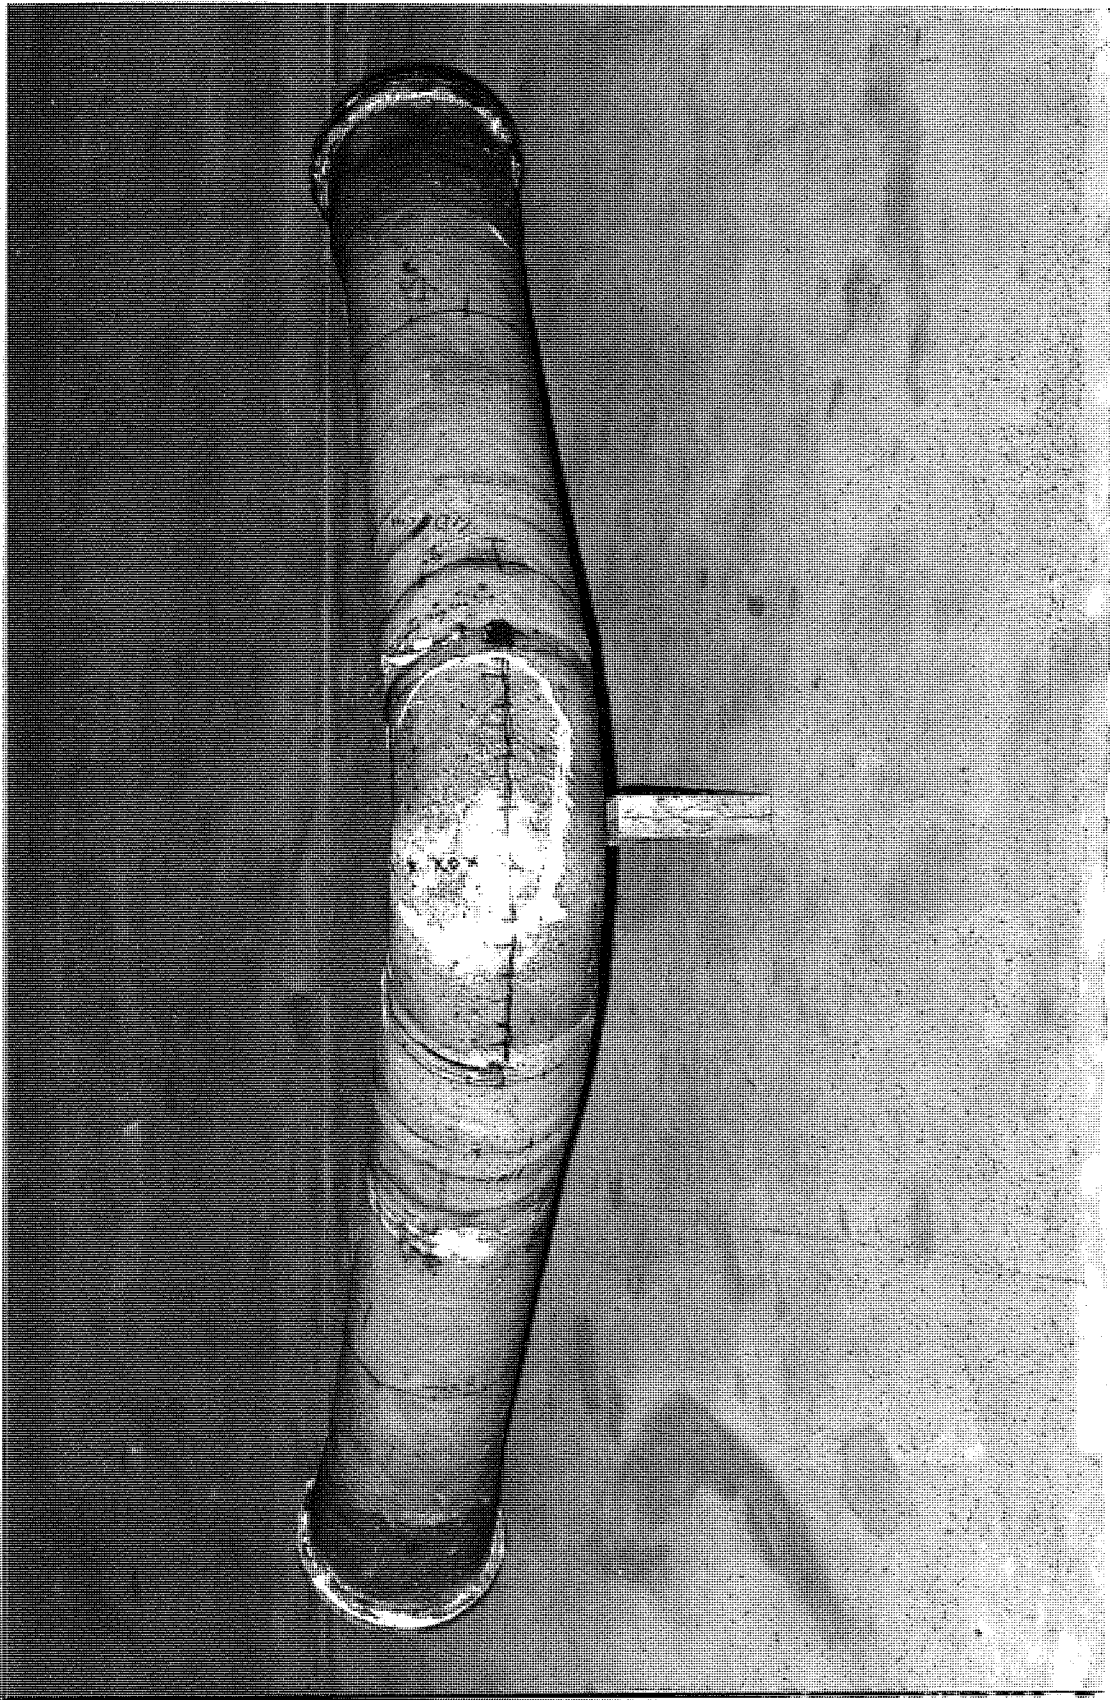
Picture showing location of failure developed on bend S022 under 27.6 bar internal pressure.
